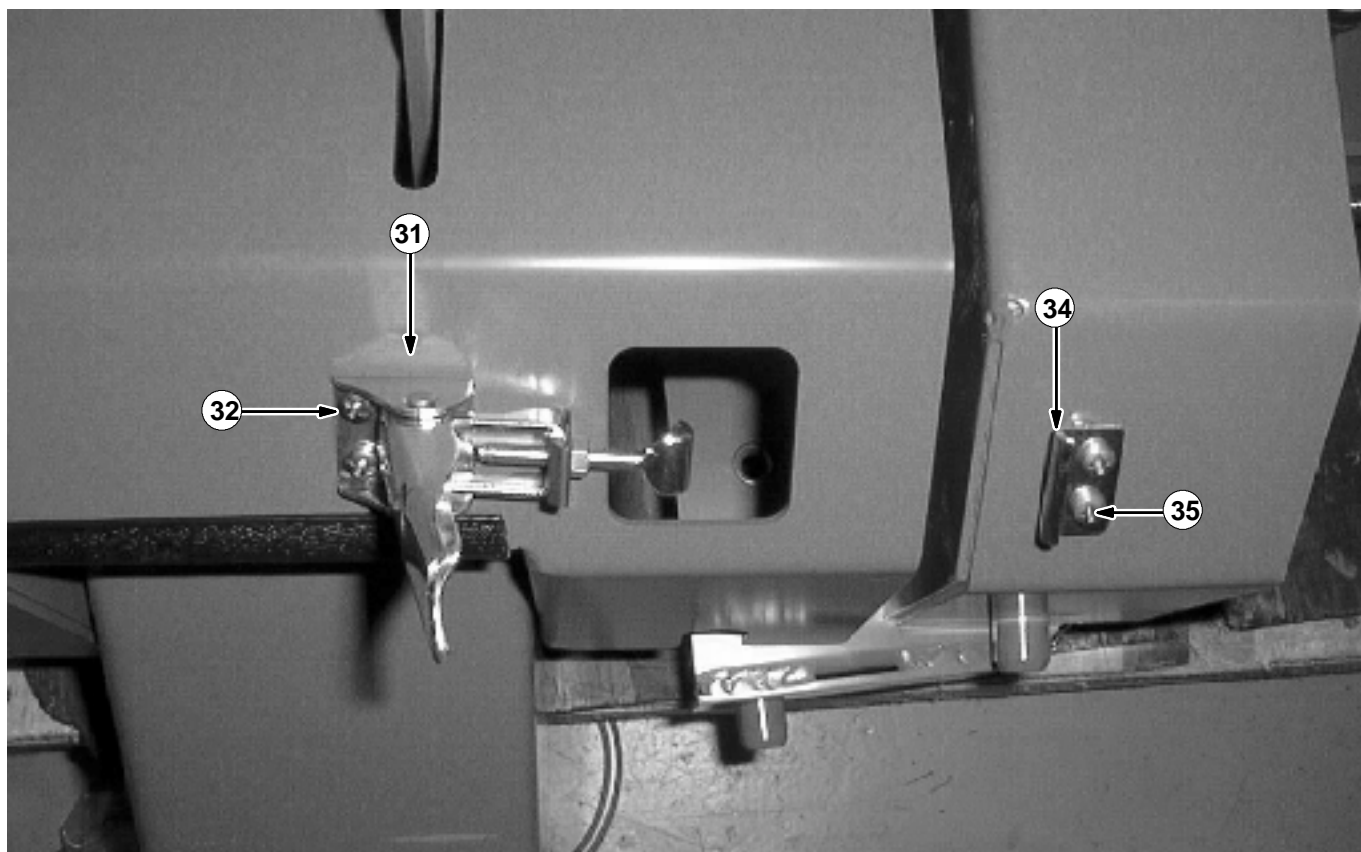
MOP FRAME WELDMENT SPRING INSTALLATION
